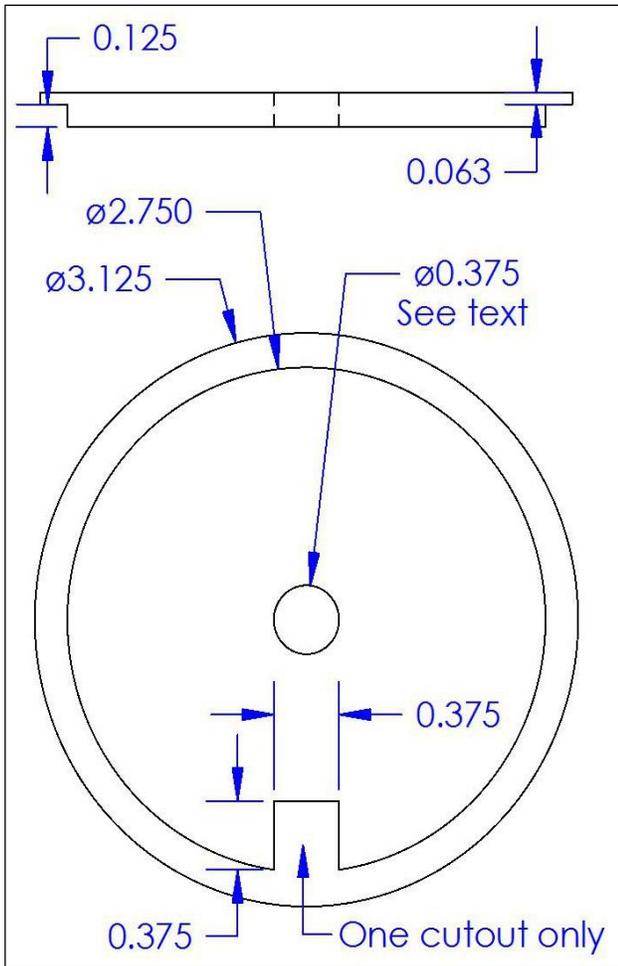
Construction drawing for the barrel flanges. Material is 3/16" thick brass. Two flanges are required, but only one will have the cutout for the fusee cable.
